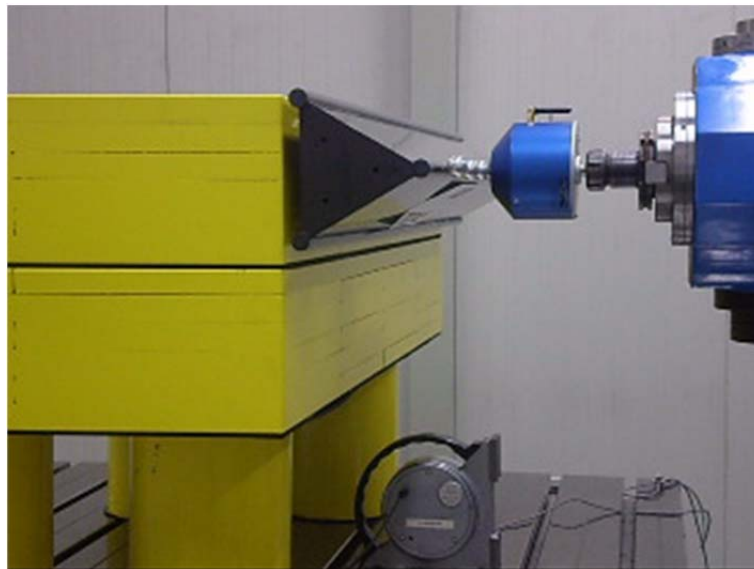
The wireless self-centring probe on the SOMMACT demonstrator
